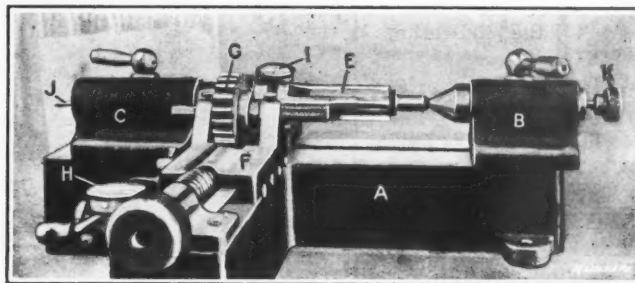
Fixture for testing Concentricity of Pinion Shaft
